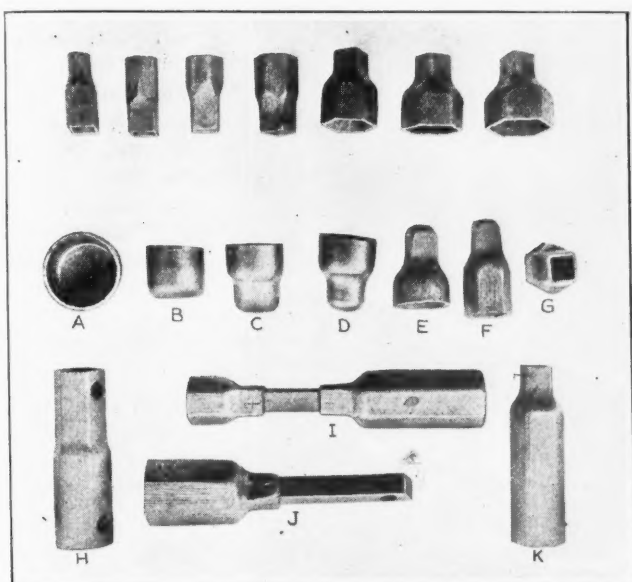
Socket and Spark-plug Wrenches, and Complete Set of Shells for One Size of Socket
